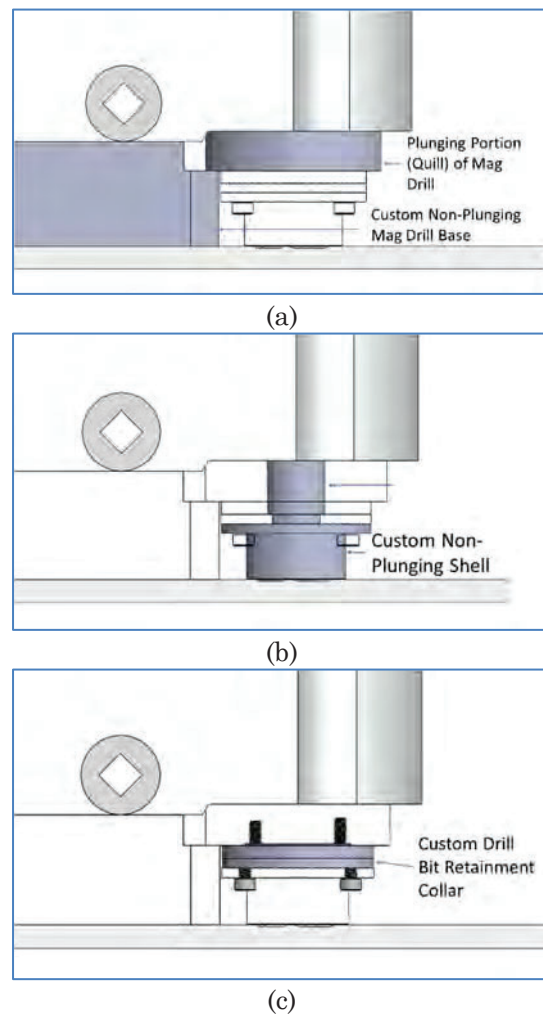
Machining Safety Devices (a) Physical limit stop on mag drill on drill chuck, (b) drill bit island depth limiting within end mill, and (c) device to fix drill bit position with respect to drill chuck.
